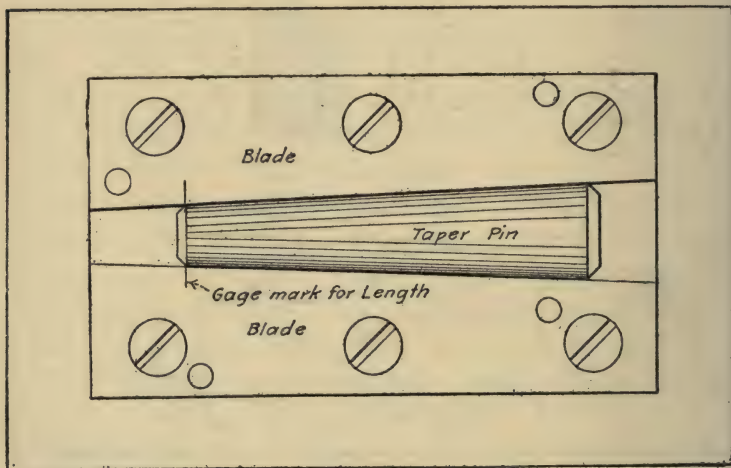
RECEIVER GAUGE FOR TAPER PINS
